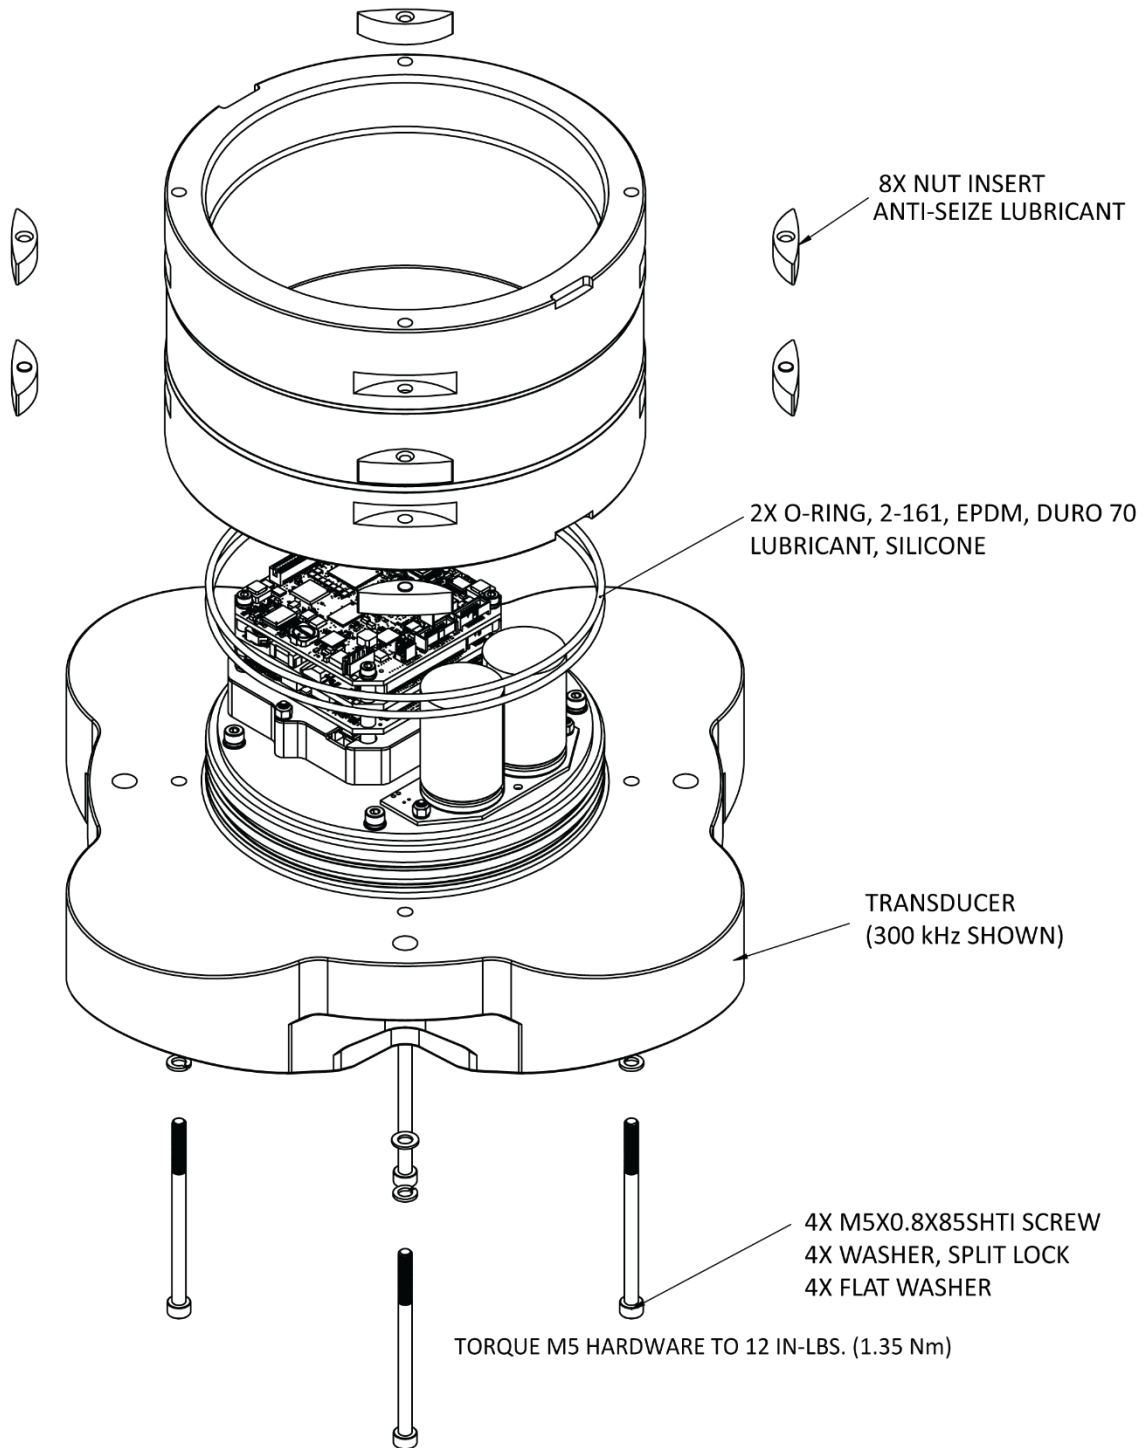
300/600 kHz Direct-Reading Parts Location – Housing
